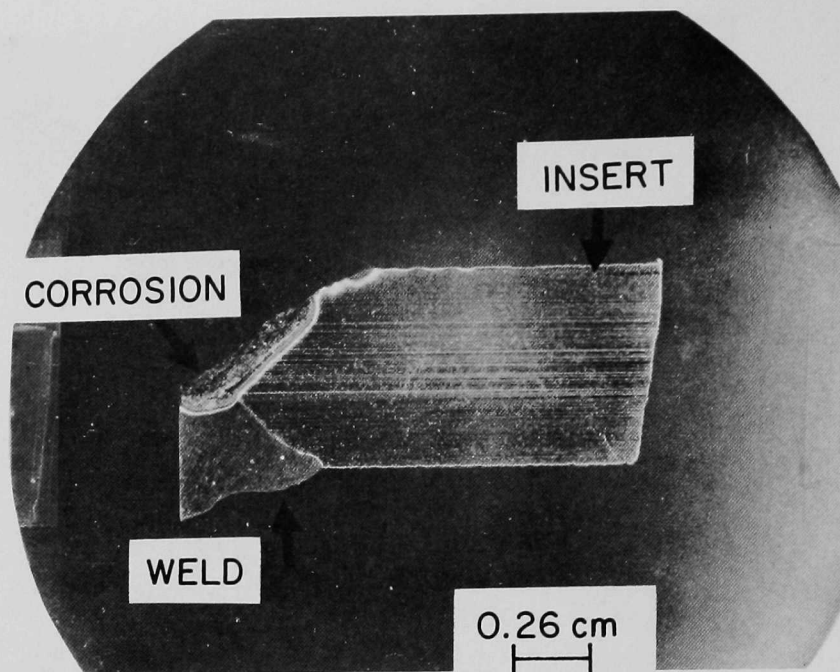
Photograph of a Polished and Etched Cross Section of the Hard-faced Insert. The weld and insert material are shown. Neg. No. ANL-306-78-587
